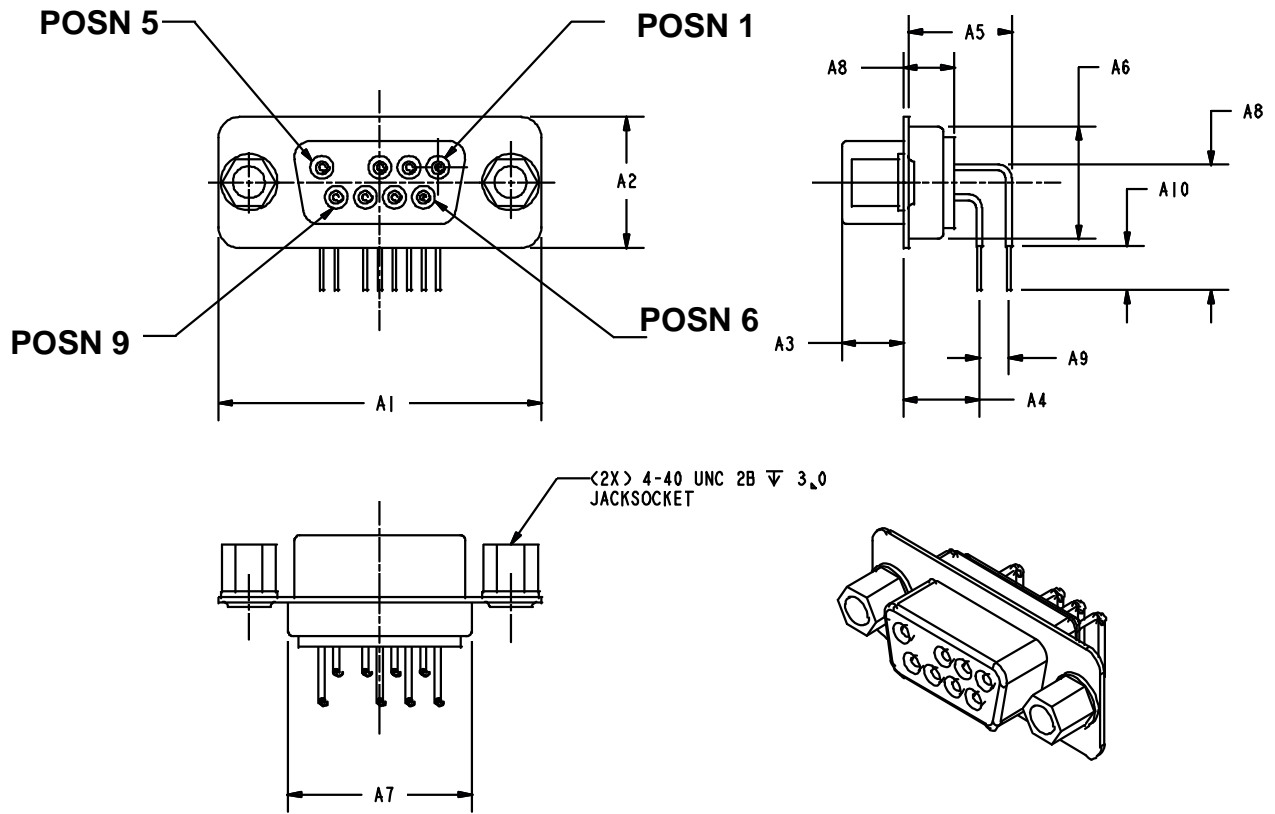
Fixed board right angle through hole (version 2) overview and outline dimensions
